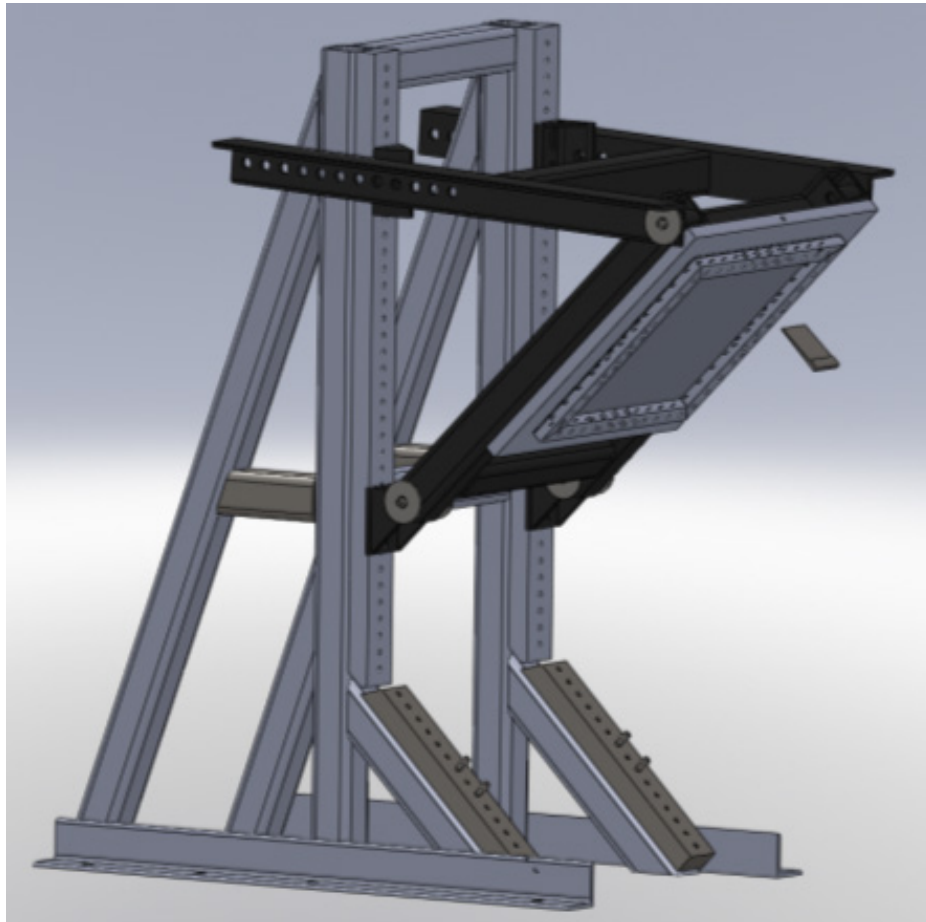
Large panel test setup showing orientation of projectile and test specimen.
